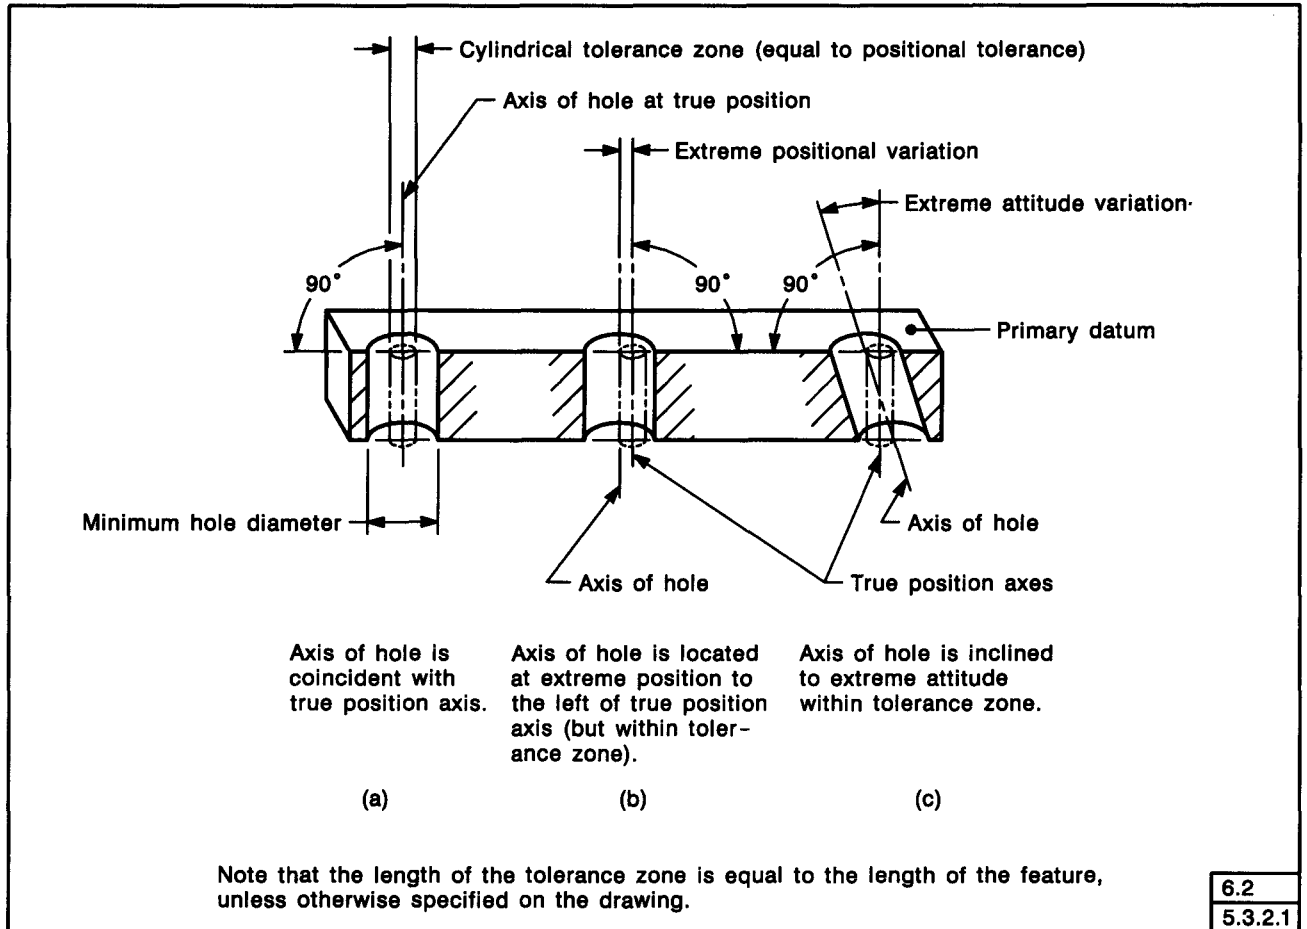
HOLE AXES IN RELATION TO POSITIONAL TOLERANCE ZONES
